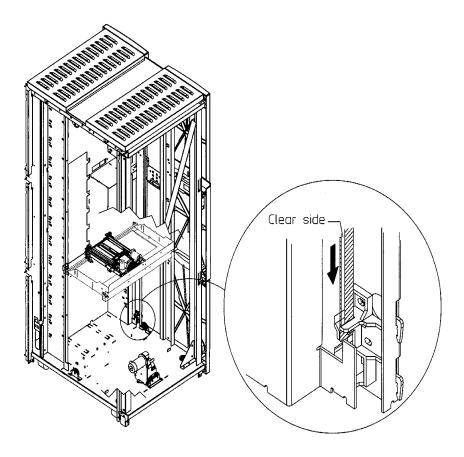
Releasing the Lower End of the Vertical Encoder Strip
